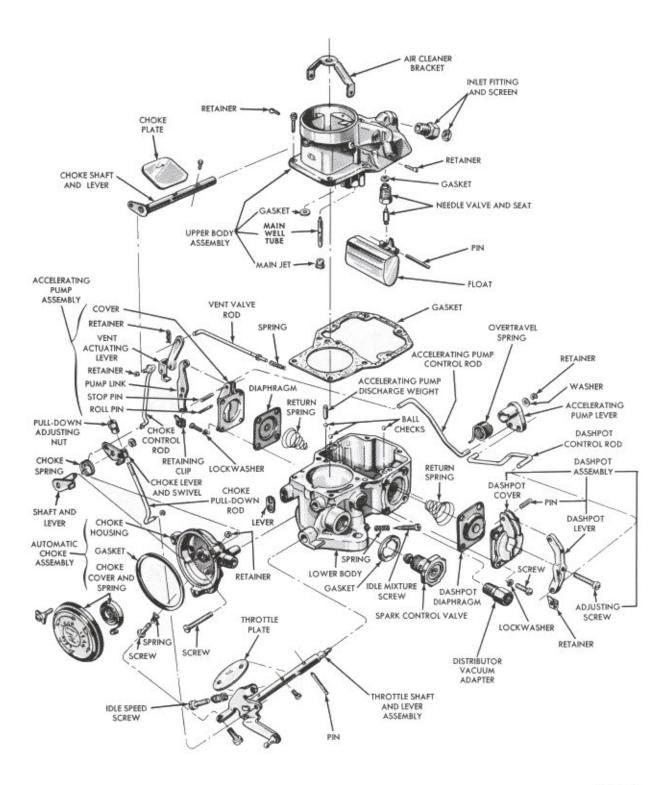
Ford Single-Barrel Carburetor-Automatic Choke-Disassembled
